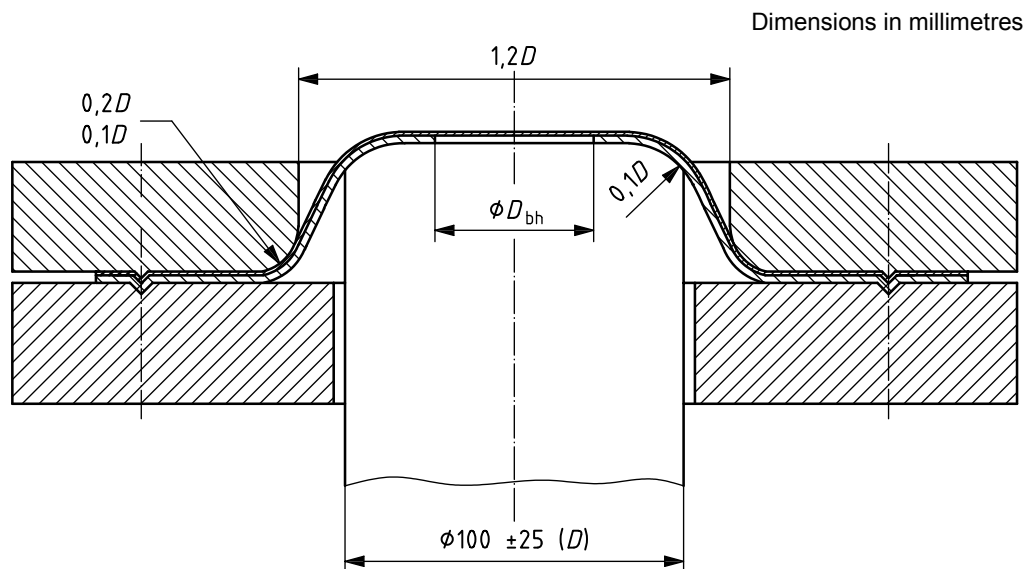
Illustration of the cross section of the tool used for Marciniak testing
